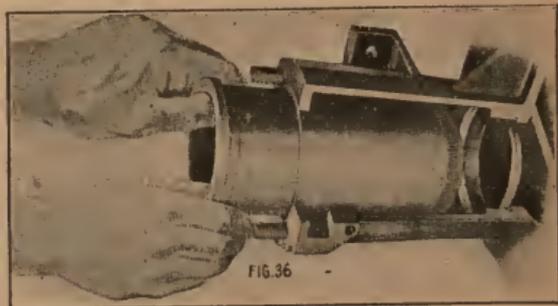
Cylinder cut out to show how the Avery inner cylinder wall may be removed.
